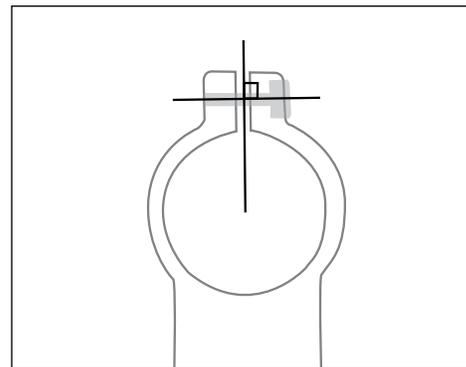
Clamp bolts should be tangential (perpendicular to the radius)
